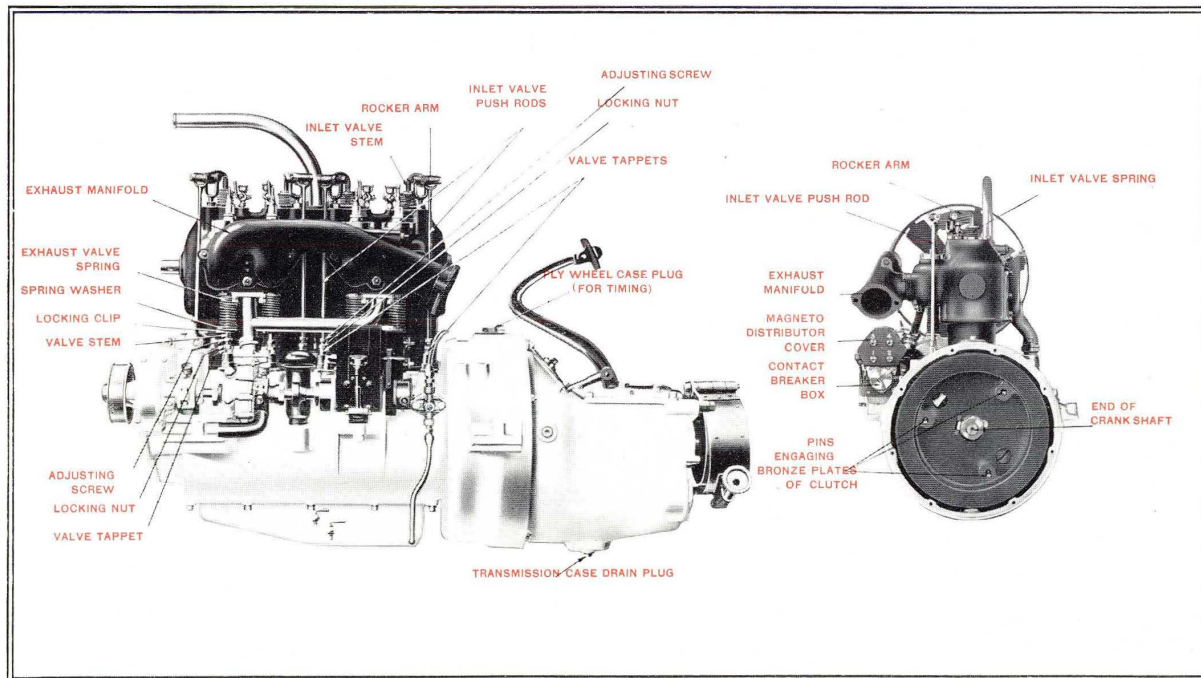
Exhaust Side and Rear View of Chalmers "30" Motor
